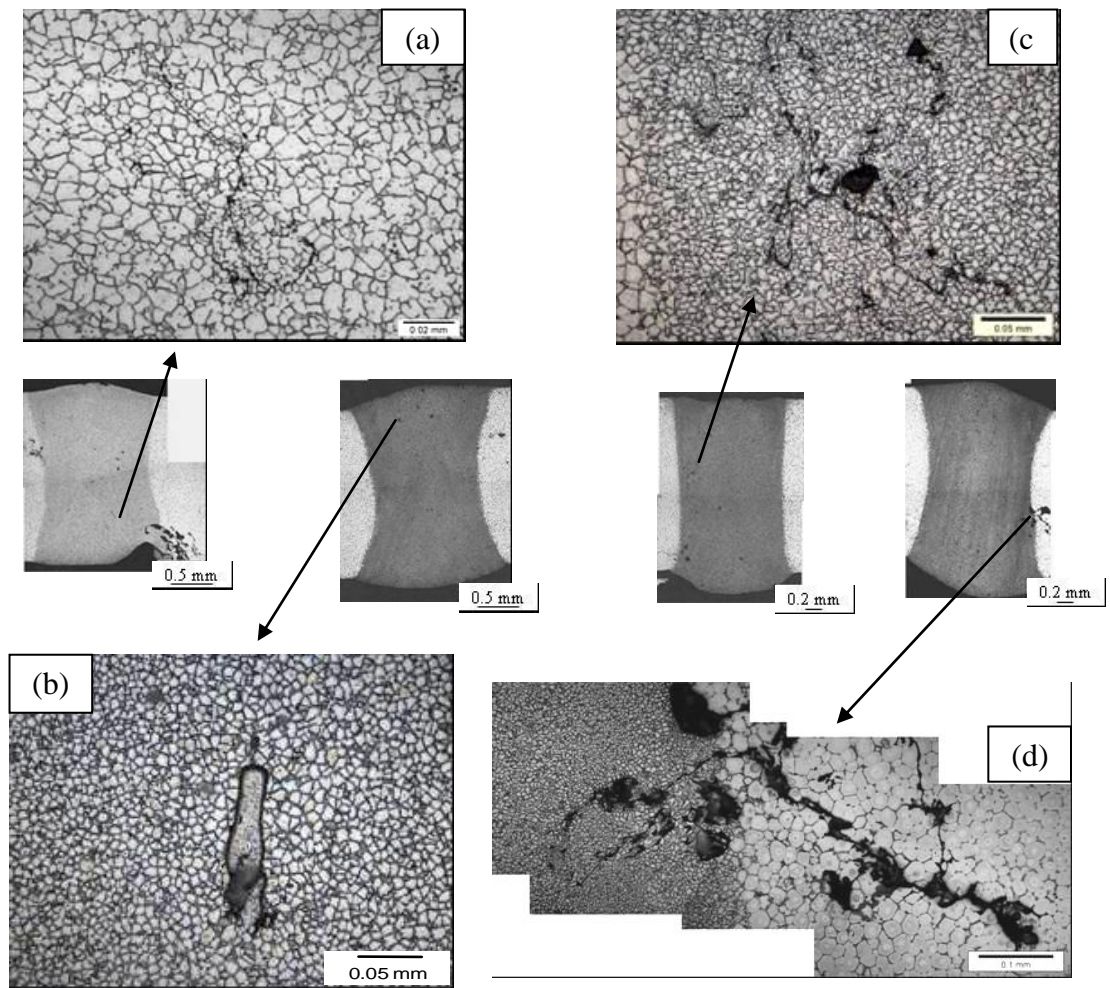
Solidification Cracks in the FZ initiated by Various Sources Observed in Laser Welding of ZE41A-T5 Mg alloy.
